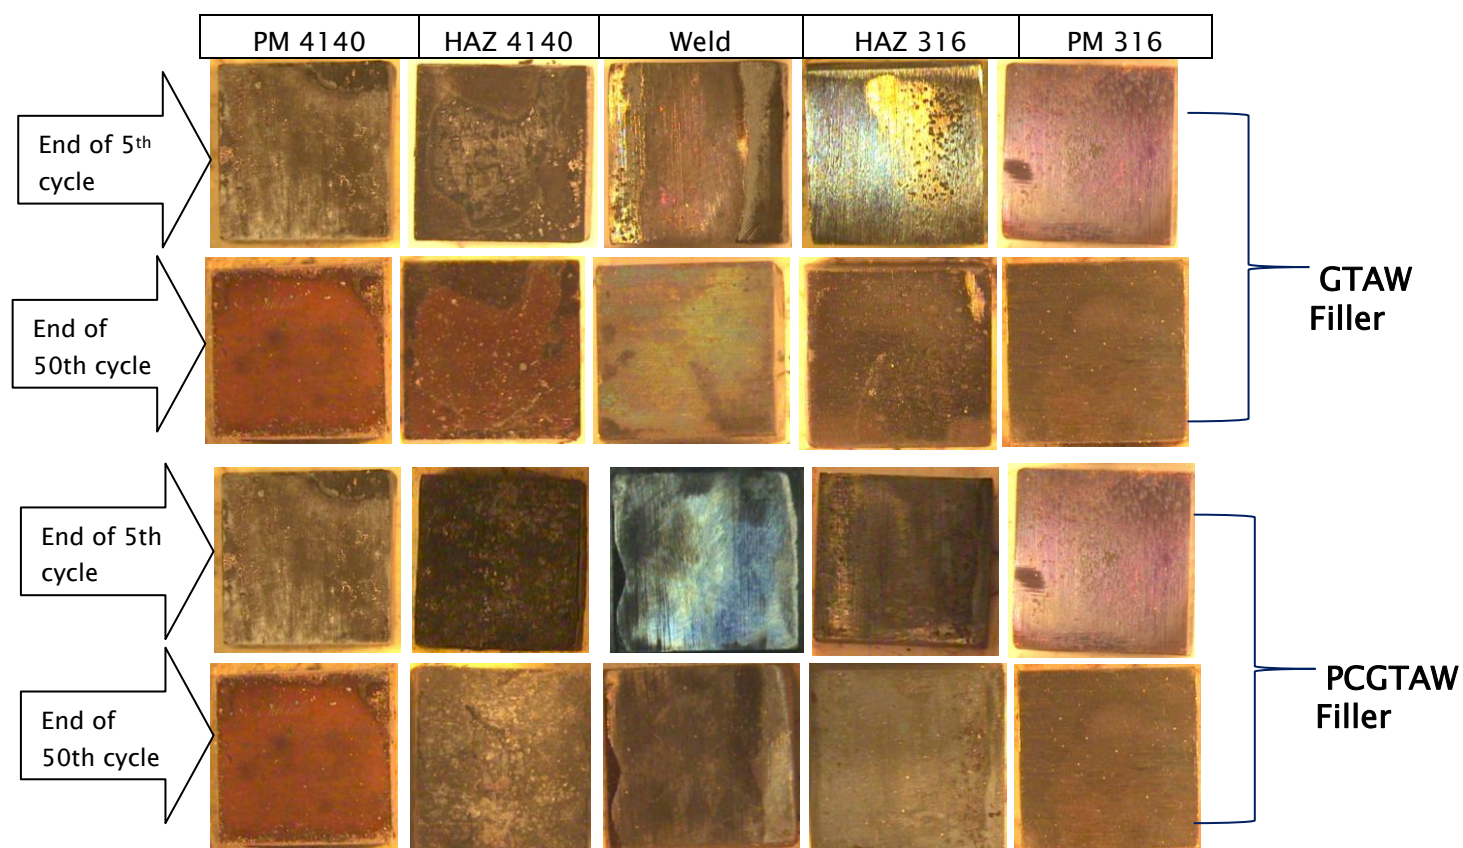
Macrographs of the corroded samples of GTA and PCGTA weldments employing ER309L filler subjected to air oxidation at 600° C
